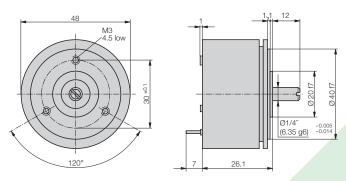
KINAX 3W2 with shaft dia. 1/4", length 12 mm.
